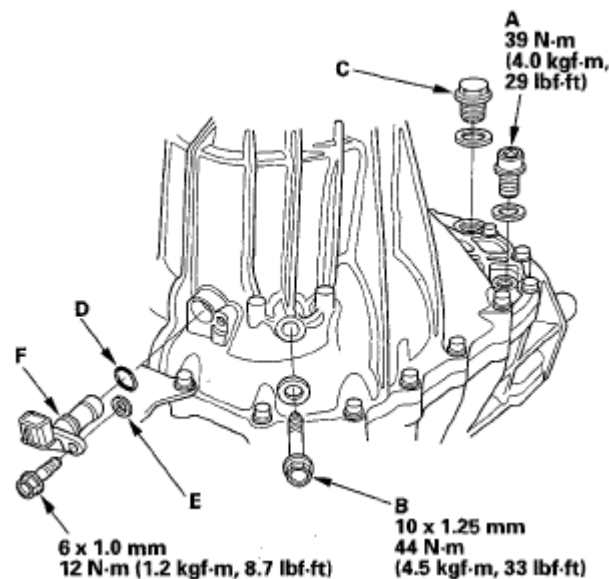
Identifying Drain Plug, Flange Bolt And Washers With Torque Specifications
